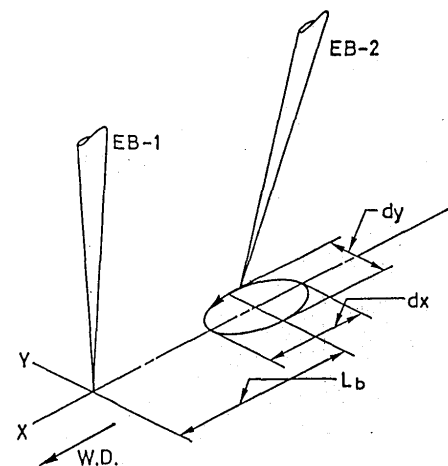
Tandem Electron Beam welding with elliptical oscillation of the second beam.
